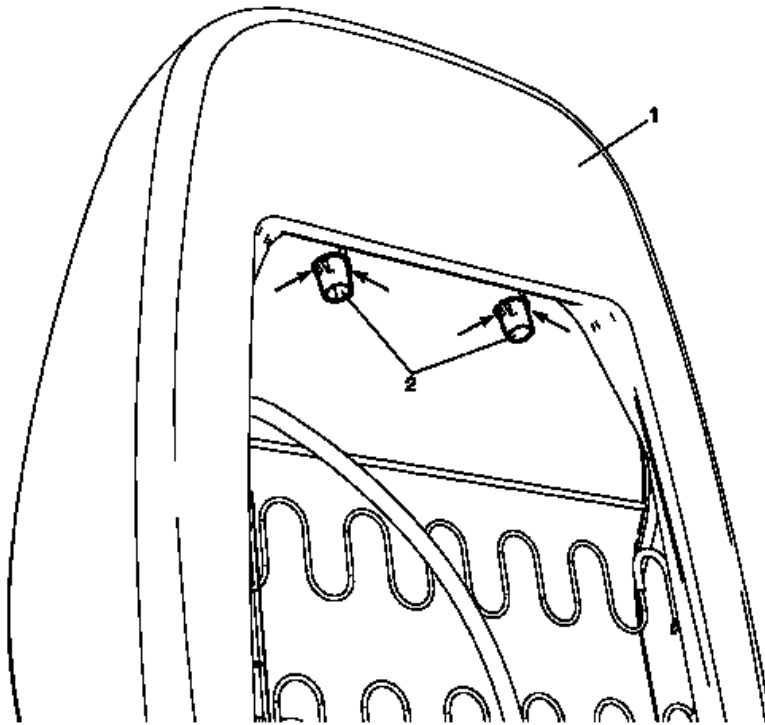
Driver or Passenger Seat Head Restraint Guide
